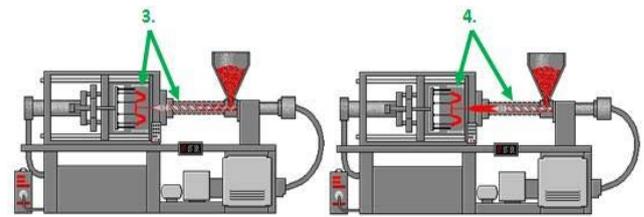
Scheme of granulate feeding and moulding parts cooling [5]
